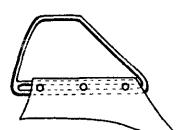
TOOL FOR HANDLING SLIP SHARES WHILE SHARPENING
